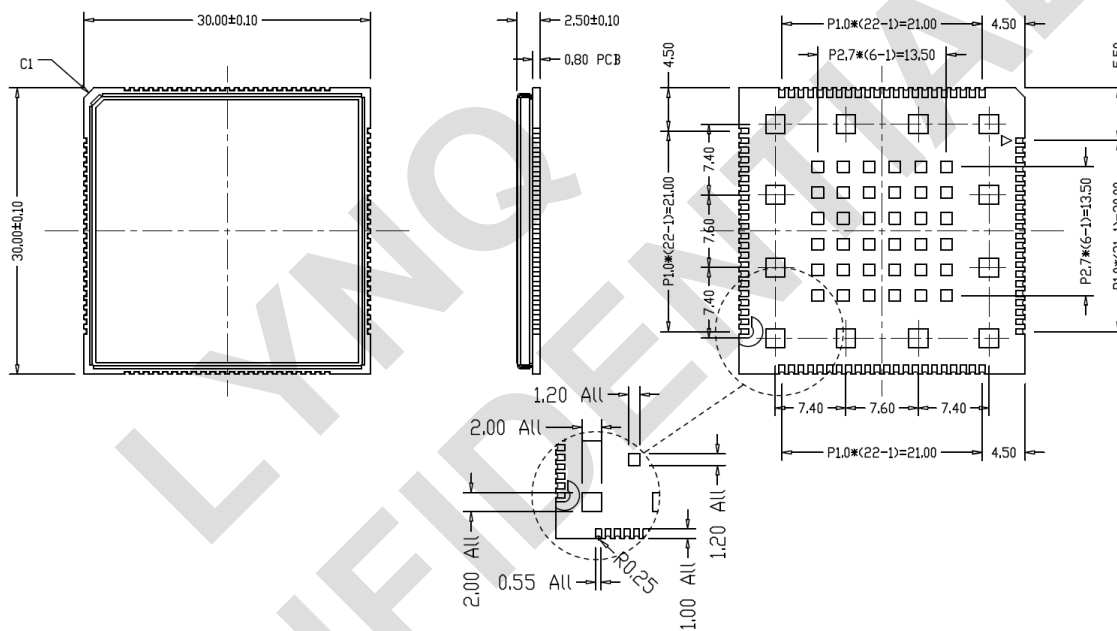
Top, Bottom, Sides Dimensions (Unit: mm)
